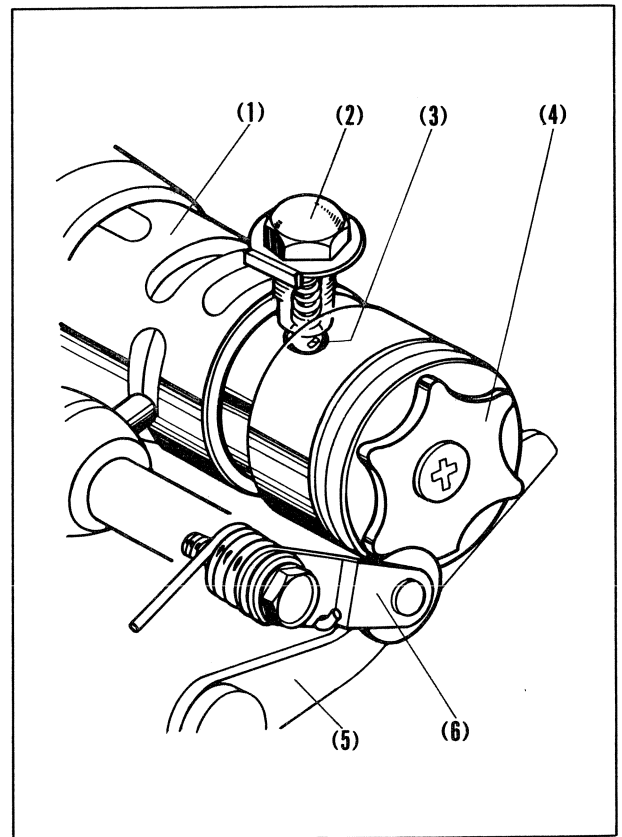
(1) Gearshift drum (4) Drum stop cam plate
